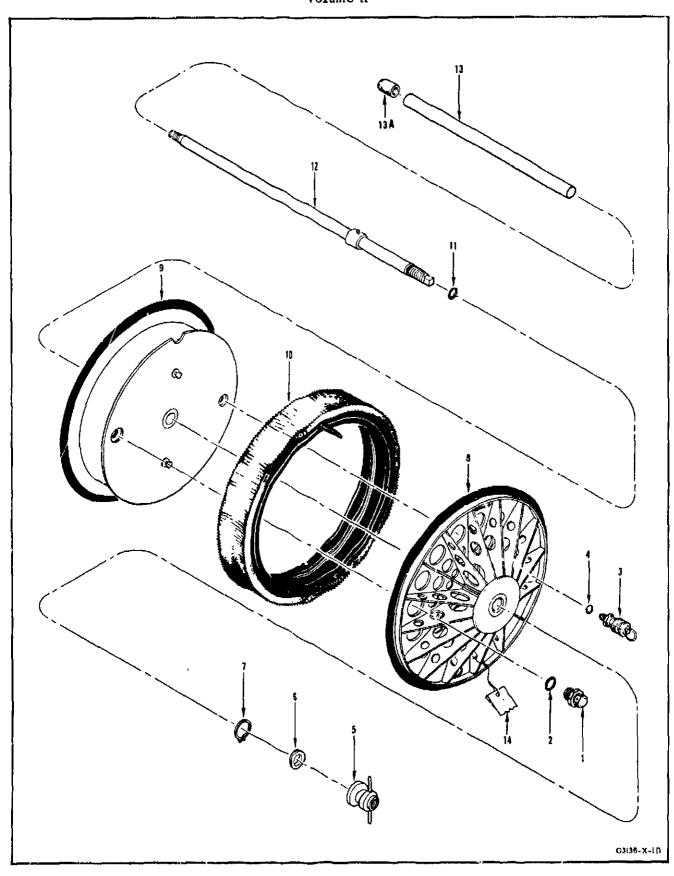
Thrust Chamber Throat Plug (Sheet 1 of 2)
